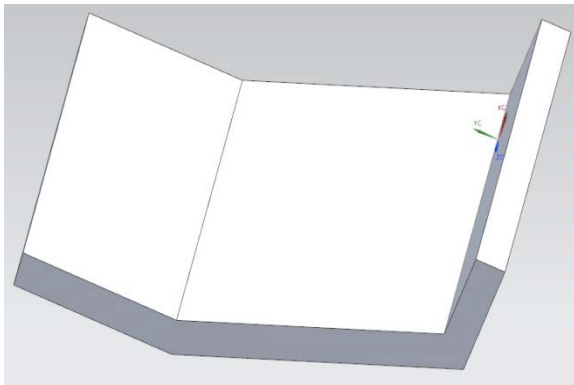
Manufacture of Bracket Component of the V-Hull Assembly
